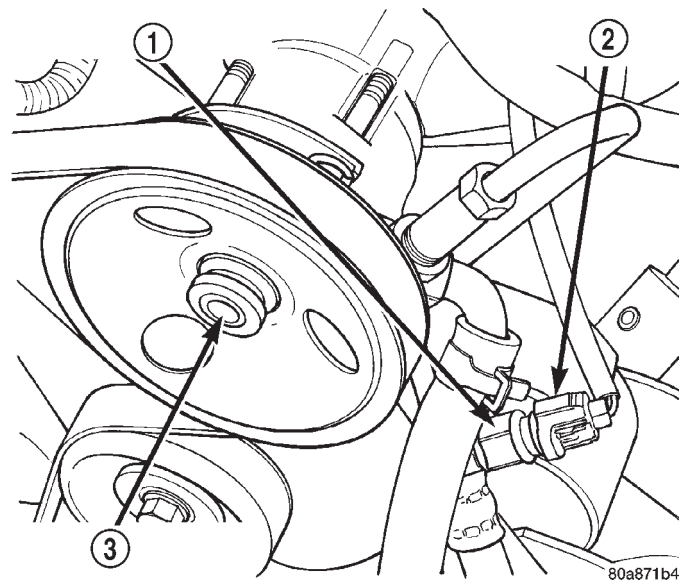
Power Steering Pump Pressure Switch—2.5L Engine
